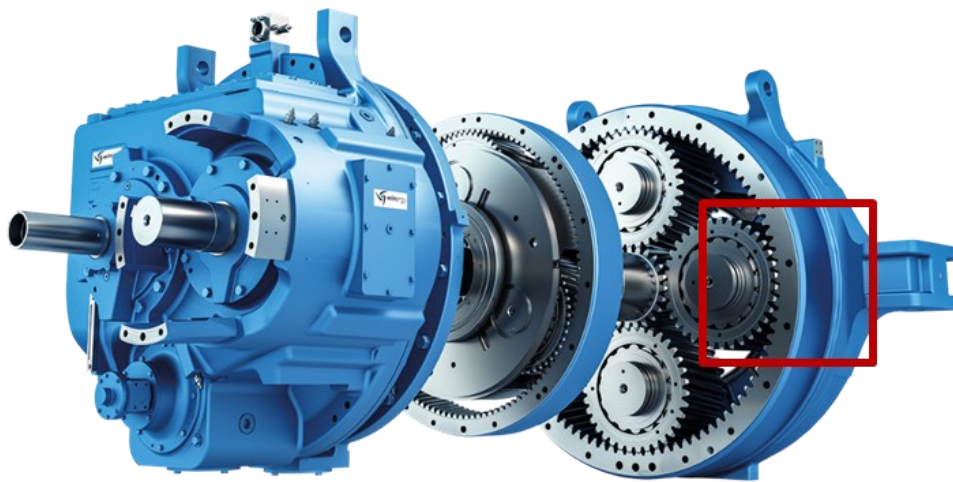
Rotor and gearbox torque is transmitted via bolted connection between the turbine frame and gear forces.
